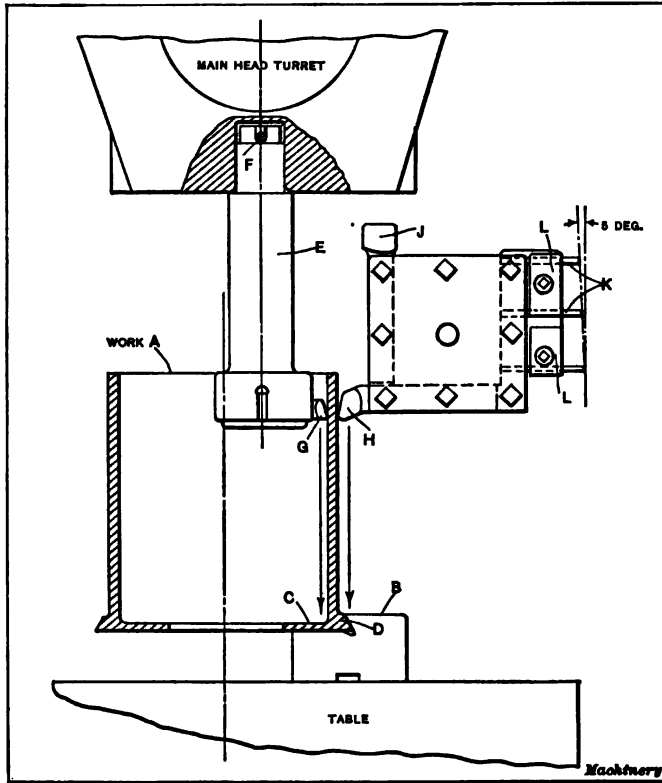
Machining a Thin Casting to be cut up into Rings on the Vertical Turret Lathe
